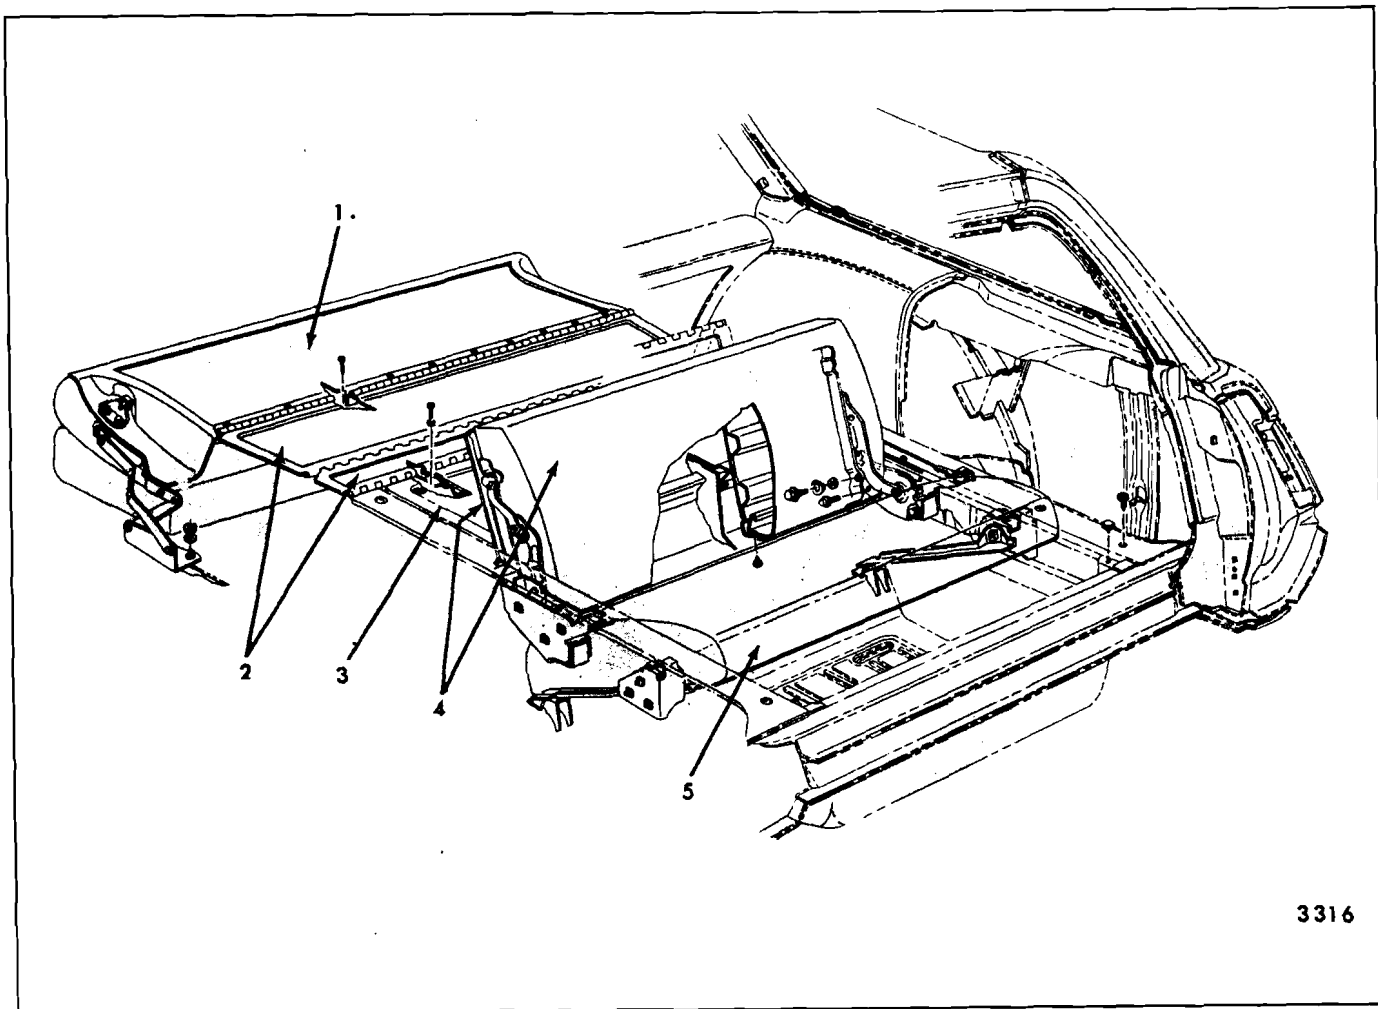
Folding Seats and Load Floor Panels - "A" Body Three-Seat Styles
